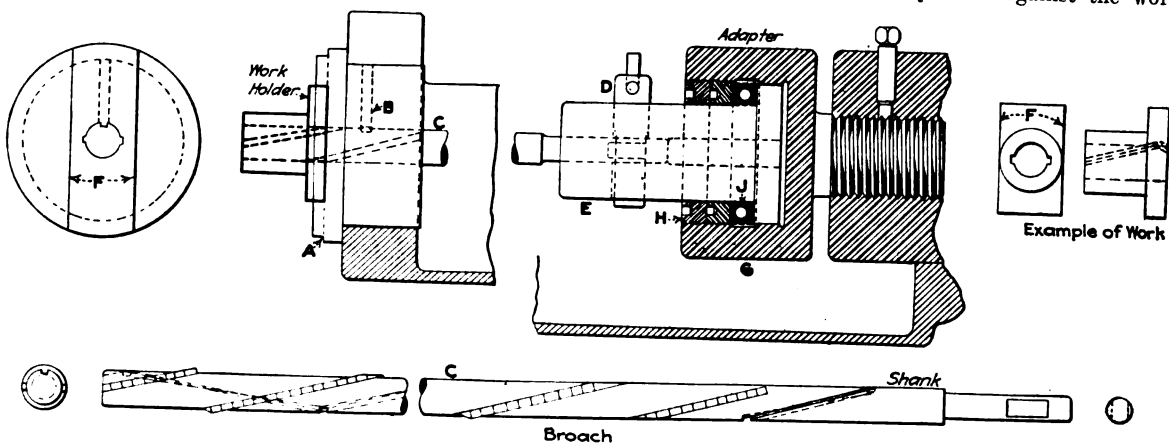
A GENERAL BROACHING JOB ADAPTED TO STANDARD MACHINERY
